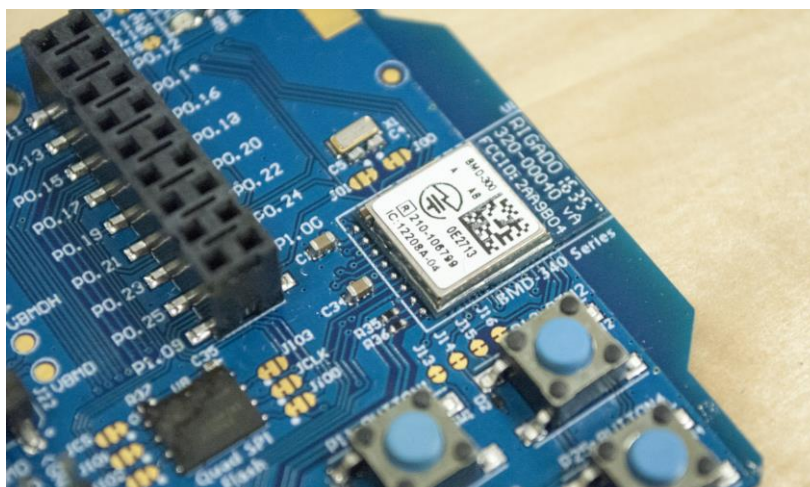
BMD-300 Module Soldered to BMD-340 Footprint
